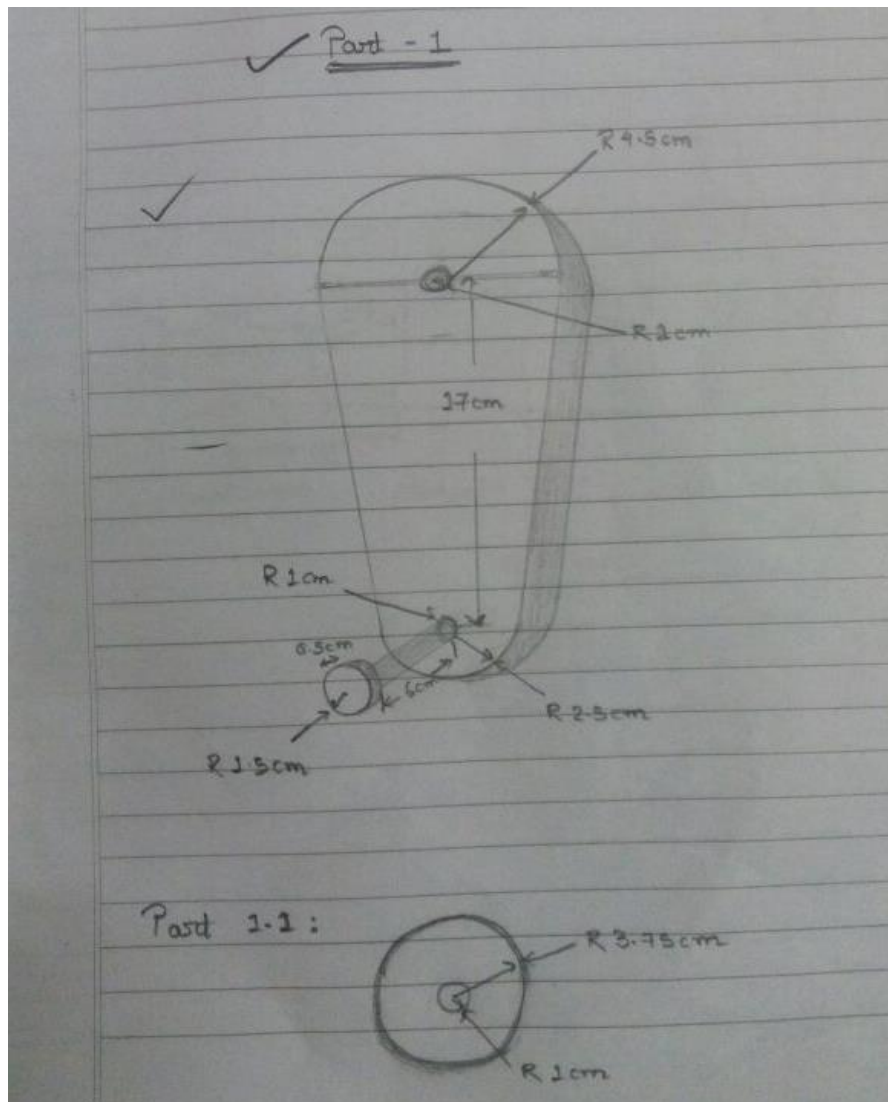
Part 1 & 1.1-Handle Arm & Knob
